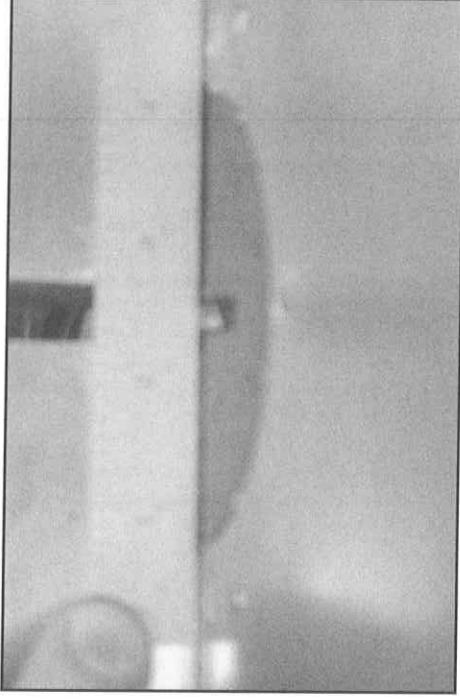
To zero crossfeed, the bit is adjusted so that the top edge is just in contact with workpiece. The "zero setting" is recorded as the scale reading and crossfeed handle position.
